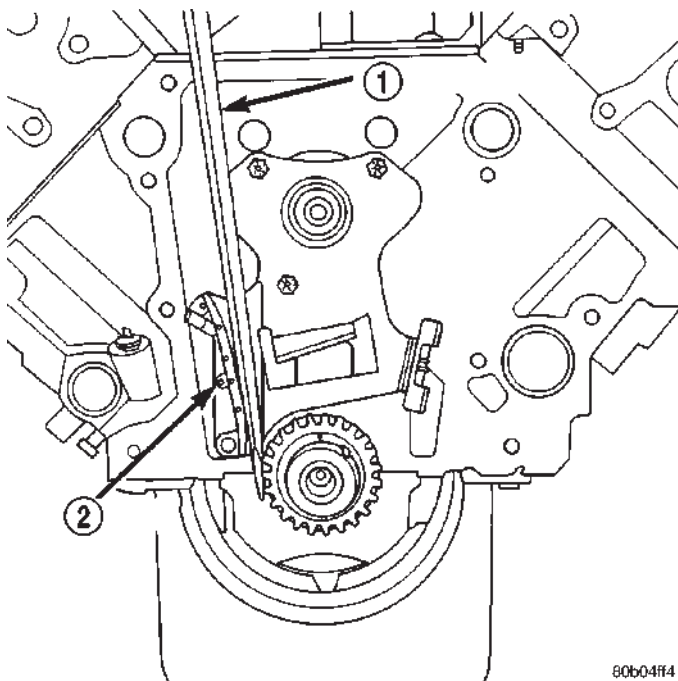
Compressing Tensioner Shoe For Timing Chain Installation
